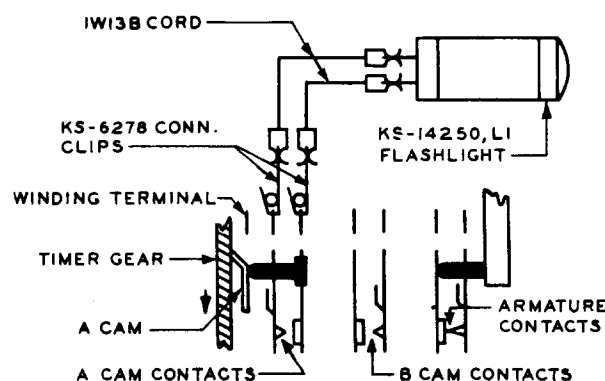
Connections for Checking "A" Cam Contact Closure
